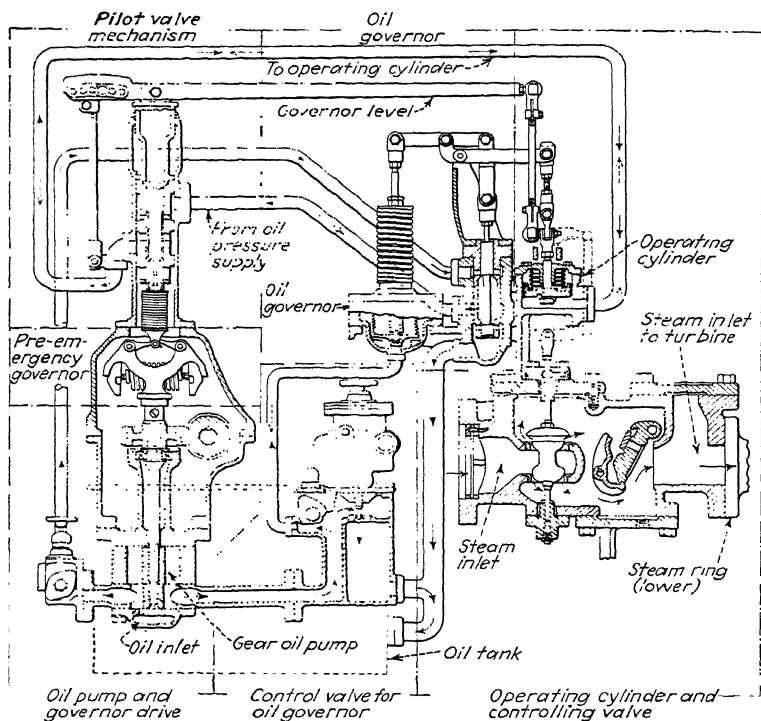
Oil relay for controlling steam-admission valves and governor gear.
